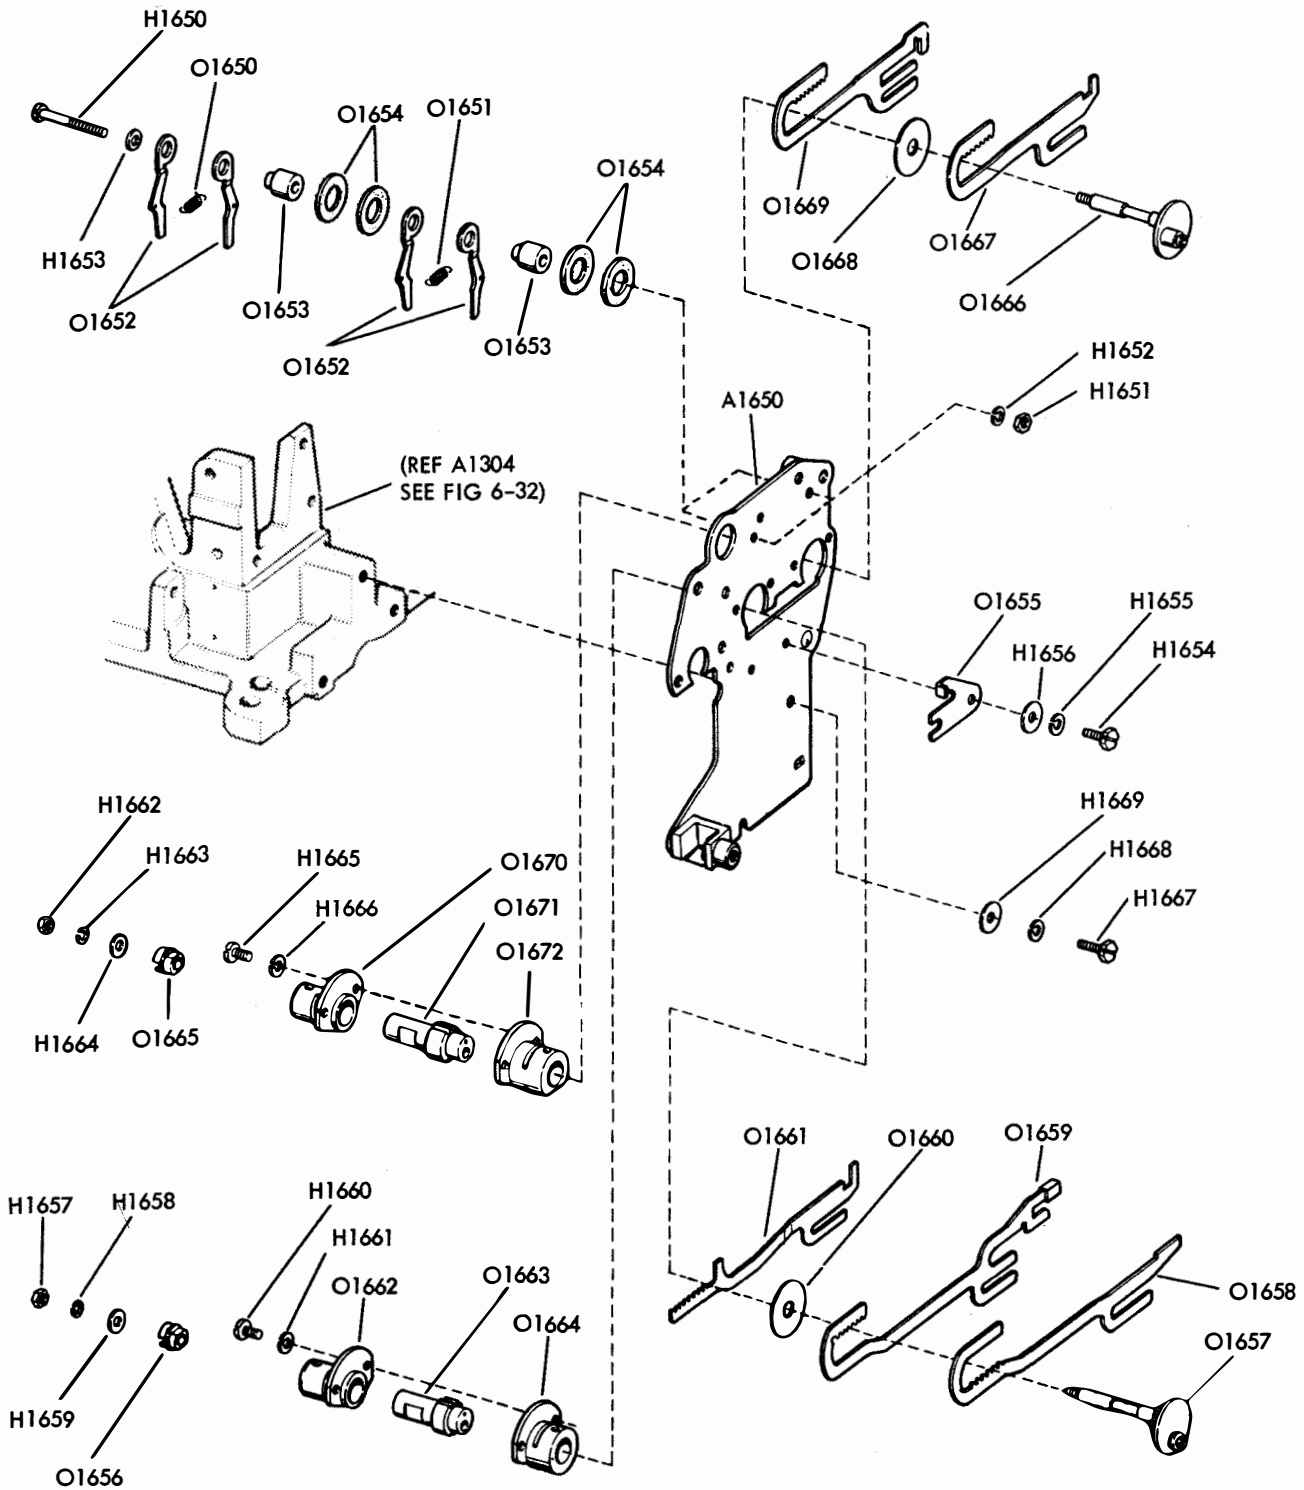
Typing Reperforator, Rotary Positioning Mechanism
